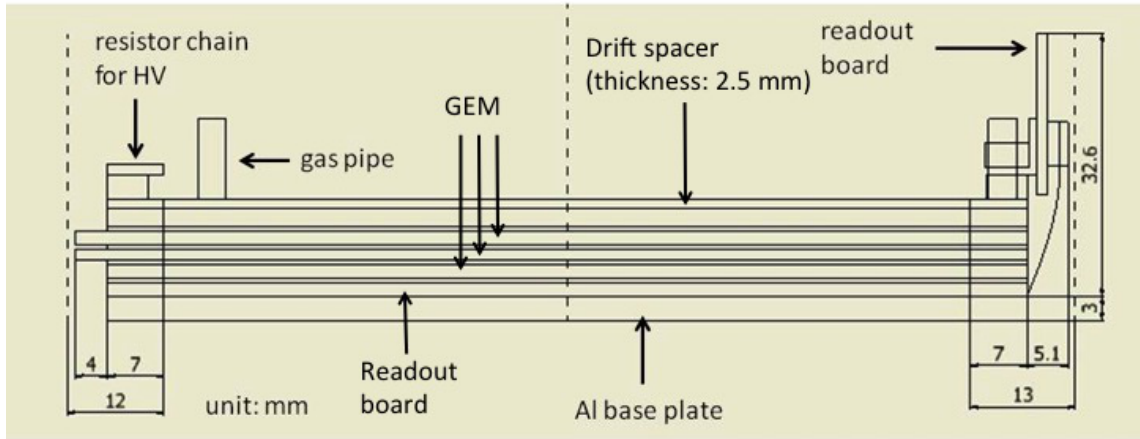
A cross section drawing of a chamber of GEM tracker.
